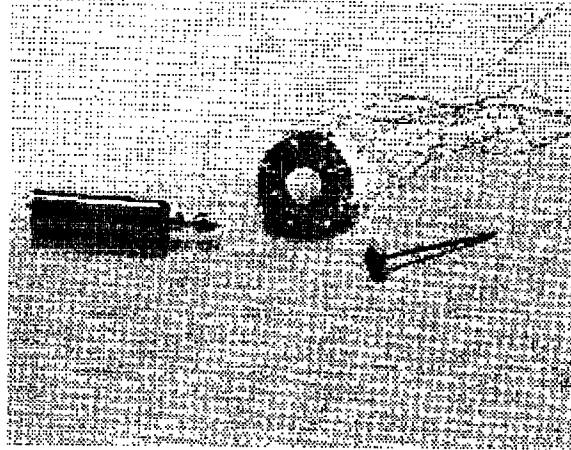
With careful machining and the skill of a watchmaker, we can make very tiny rotors and couplings using jeweled bearings and watch balance staffs for fitting onto small macro-motors made from bulk ceramic.
